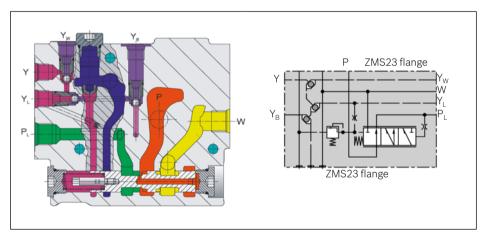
Rexroth priority valve in sandwich plate design with SB23 bolt hole pattern
